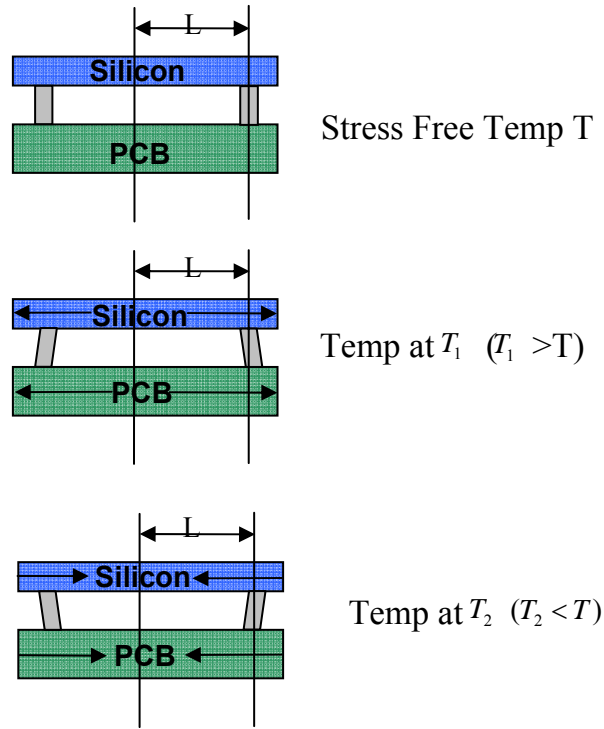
Schematic of CTE Mismatches and Solder Joint Failure due to Thermal Cycling
